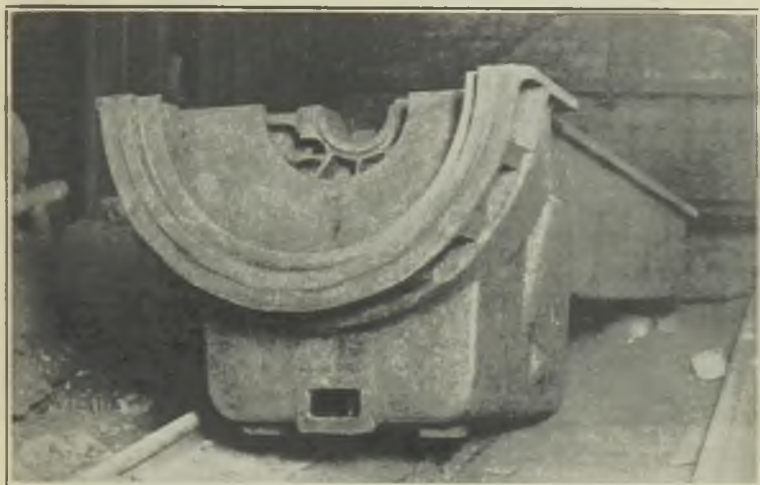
COMBINED OIL-ENGINE BEDPLATE AND END CASING.
